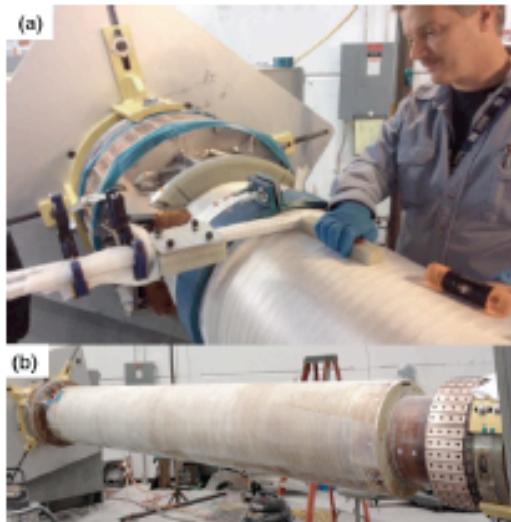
OH Winding (a) Start of the two-in-hand OH winding. (b) Completed OH coil after VPI.
